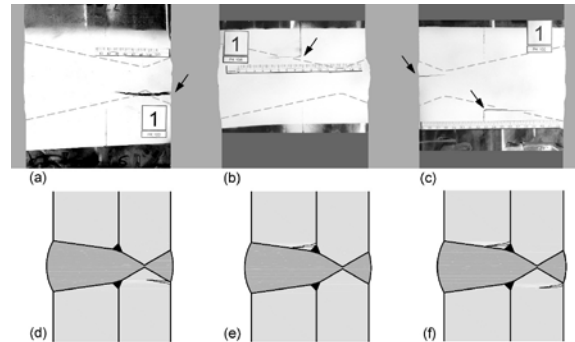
Failure of the specimens No. (a) 103, (b) 106, (c) 102; (d) Crack starting from weld toe, (e) Crack starting from the end groove weld, (f) mixed crack mode.
